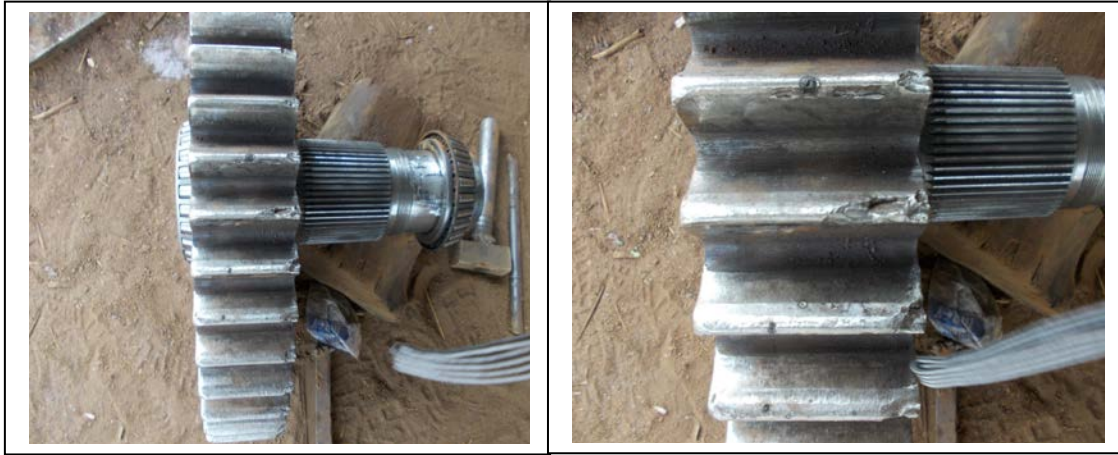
Hub gear of Bulldozer to be Rebuilt Using the Thj506 or E7018 Electrode
